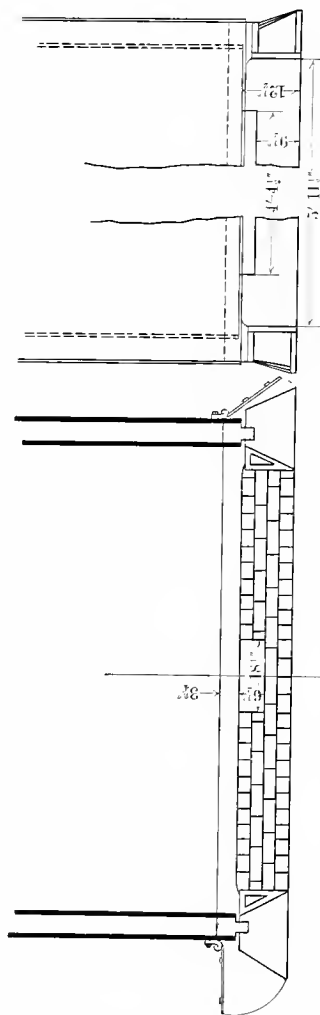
Arrangement of dampers and brickwork in fireboxes for tests when coal was used as fuel.
